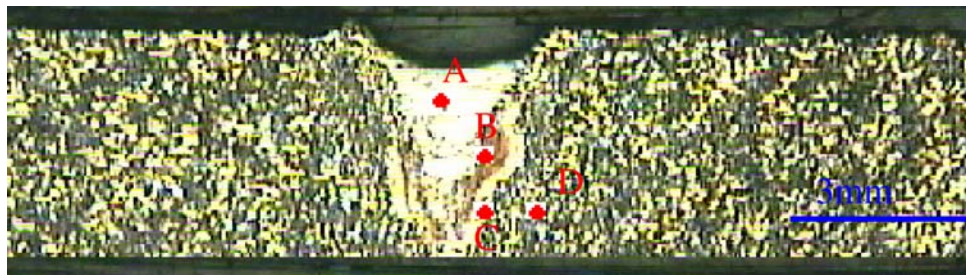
Macro-structure of the laser welded joint with 0.3 mm thick Ti filler
